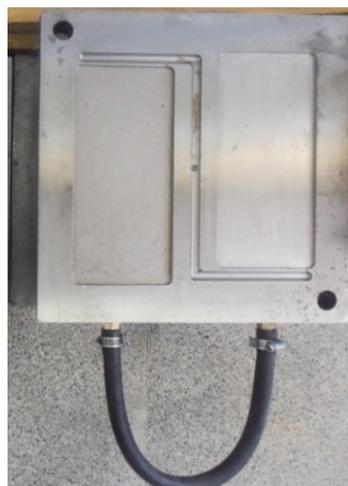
The mold of injection molding machine used to prepare nano composite foam plates
